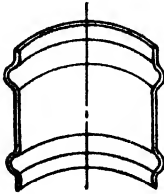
A drawn cylinder can be formed to produce a part having the section here shown (only half of the cylinder is pictured) in a split die by using a rubber punch to expand the circumferential ribs, as in Fig. 49.
